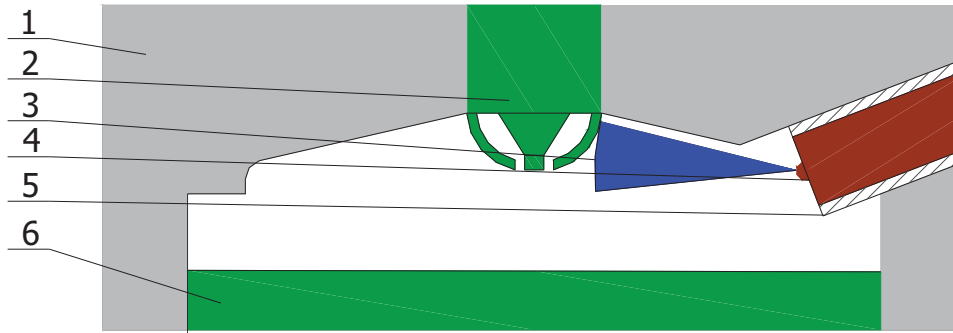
The modified combustion chamber of the Toyota engine with spray guided fuel stream: 1- head, 2- spark-plug, 3- fuel stream, 4- injector, 5- leading bush, 6- piston
